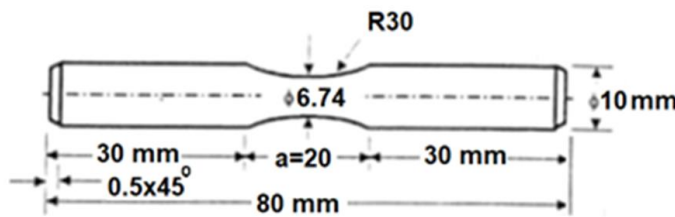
Fatigue specimens (ASTM) according to (DIN 50100) standard specification [29].
